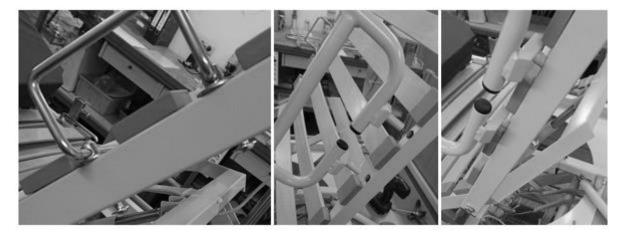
Sequence for mounting the access instead of the mattress support bracket
